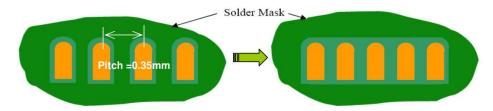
between the pads, it's recommended to use "trench" type solder mask opening to design.
